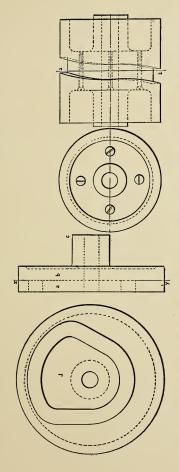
Making a Barrel Cam Pattern. Fig. 101. — Making a Face Cam Pattern.
